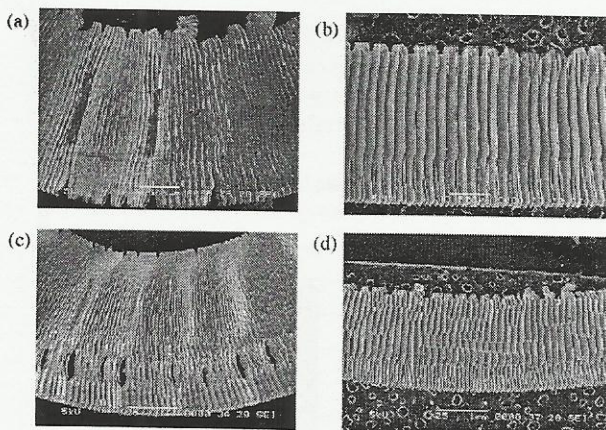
SEM top views of chips formed during: (a) room temperature machining and (b) during preheated machining at cutting speed,  $V_c = 50$  m/min; and (c) room temperature machining, and (d) preheated machining at cutting speed,  $V_c = 150$  m/min. Feed rate,  $F_z = 0.1$  mm/tooth, DOC = 1 mm. Magnification: 40 $\times$ .
